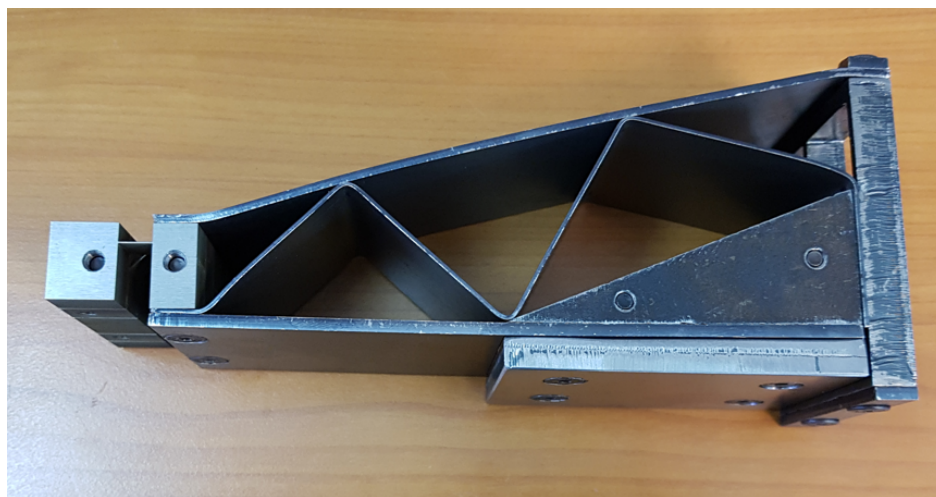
Fastening the bolts at the top and bottom of the cross-straight flexure assembly such that the 1 mm plate is trapped inside the mechanism.
